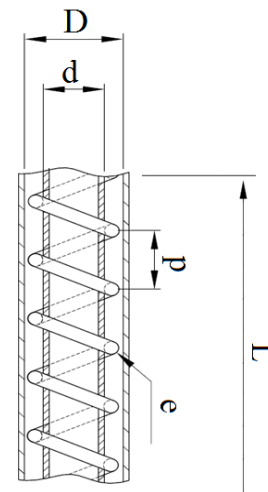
Turbulator dimensions and cross-section of the apparatus with a view of the helical turbulent element
